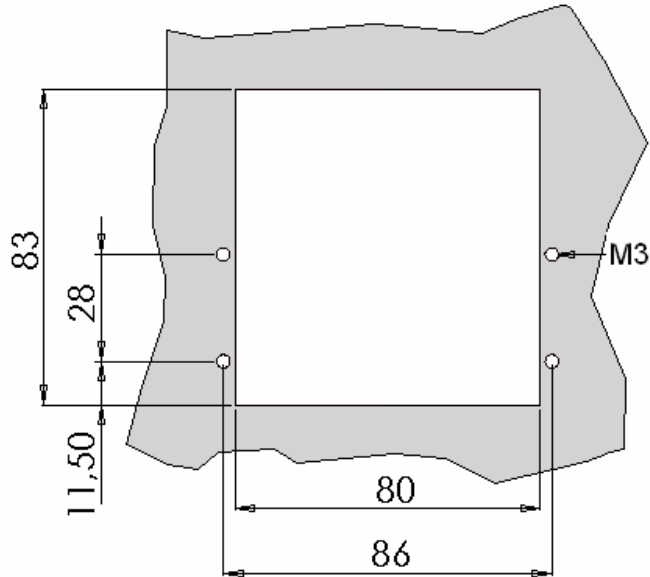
Fixing holes and window to be cut on the mounting wall
